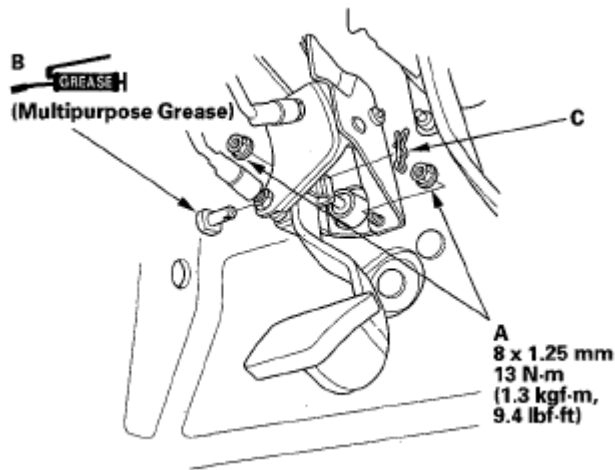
Identifying Master Cylinder Mounting Nuts With Torque Specification
